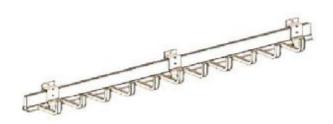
E SINGLE RAIL CLAMP WALL MOUNT
